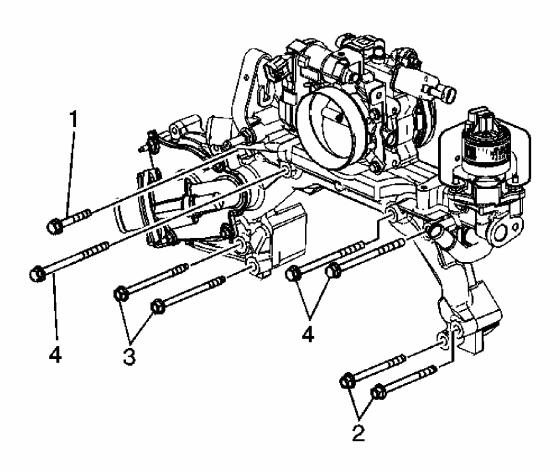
Idebtifying Water Pump Housing & Bolts Courtesy of GENERAL MOTORS CORP.
